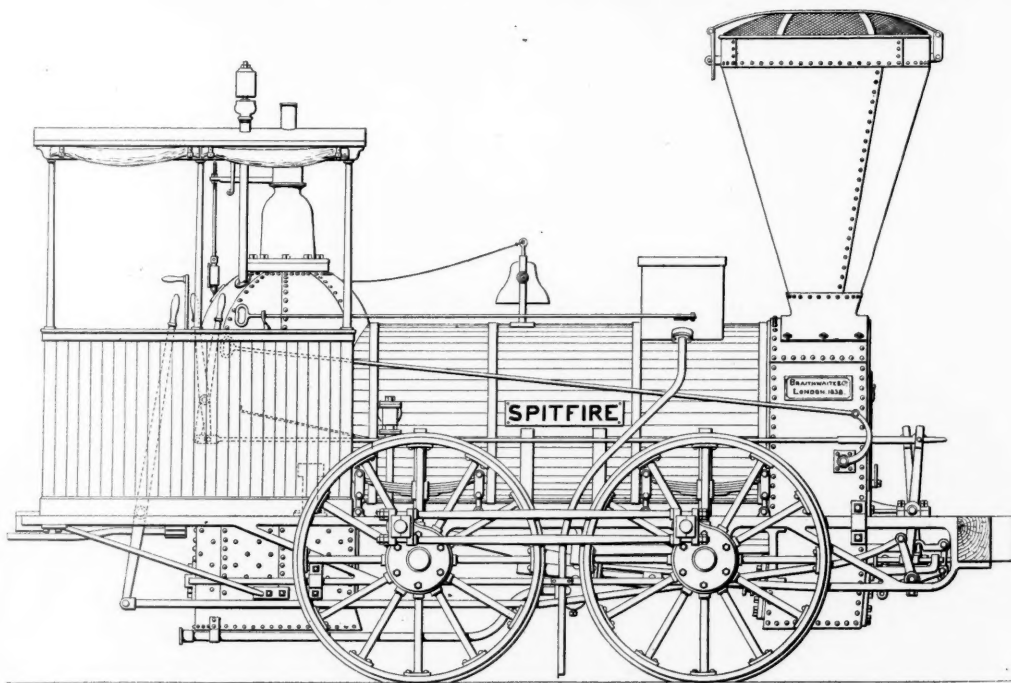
Leggetts Gap Railroad Construction Engine, 1850.
